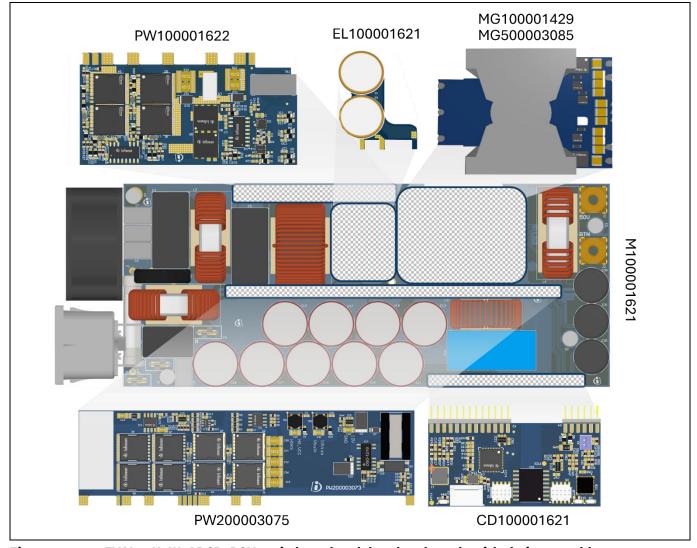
EVAL_3K3W_ARCP_PSU main board and daughterboards with their assembly
